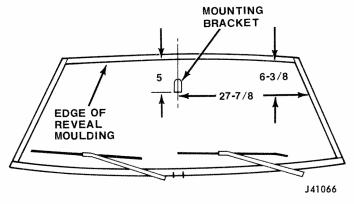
Windshield Mounted Rear View Mirror Bracket Location Dimensions (Inches)
